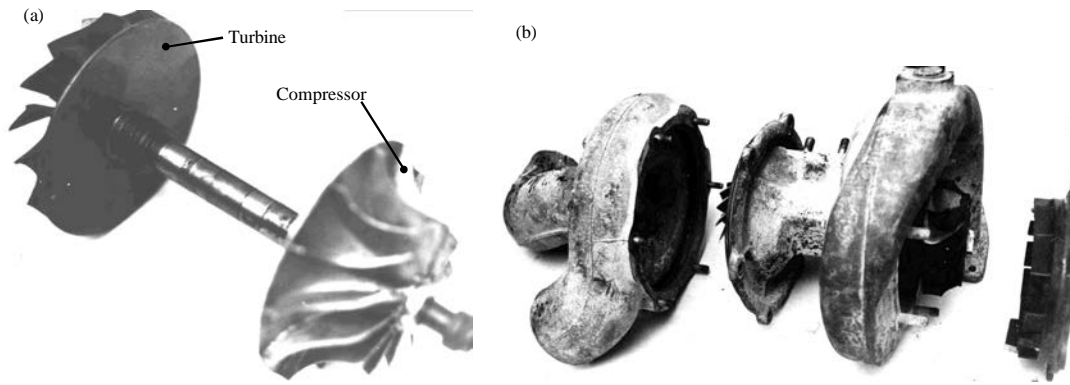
a) Gas turbine rotor and b) General view of gas turbine
